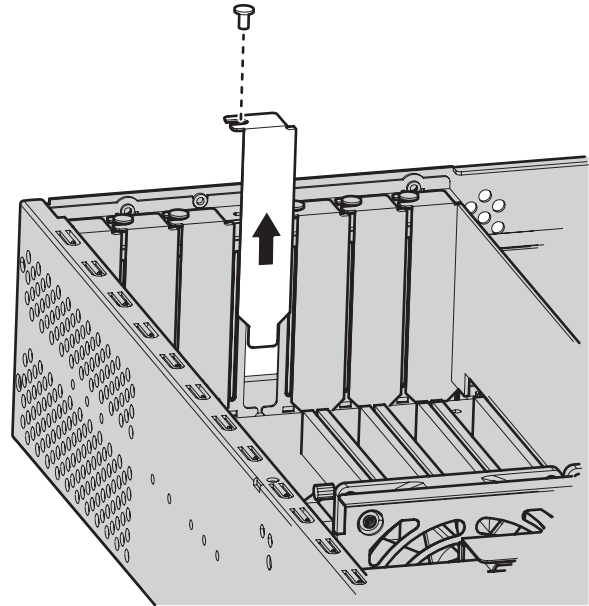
Removing the Filler Bracket: 2-Port Capture Card
